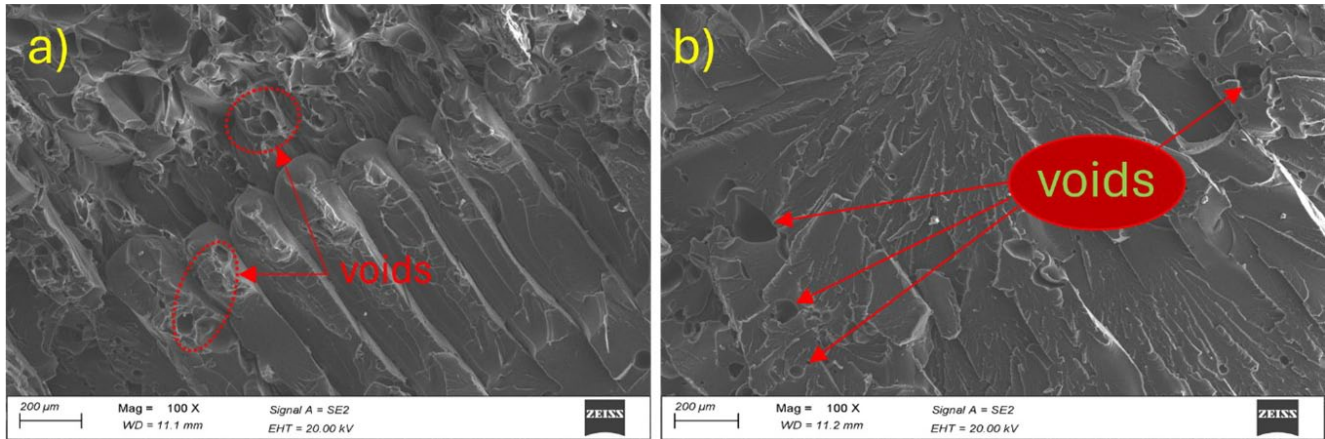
SEM image of tensile fracture morphology of the specimen with annealing (a) exp-3 (b) exp-5
